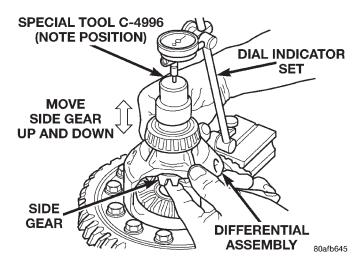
Checking Side Gear End Play (Extension Housing Side)
